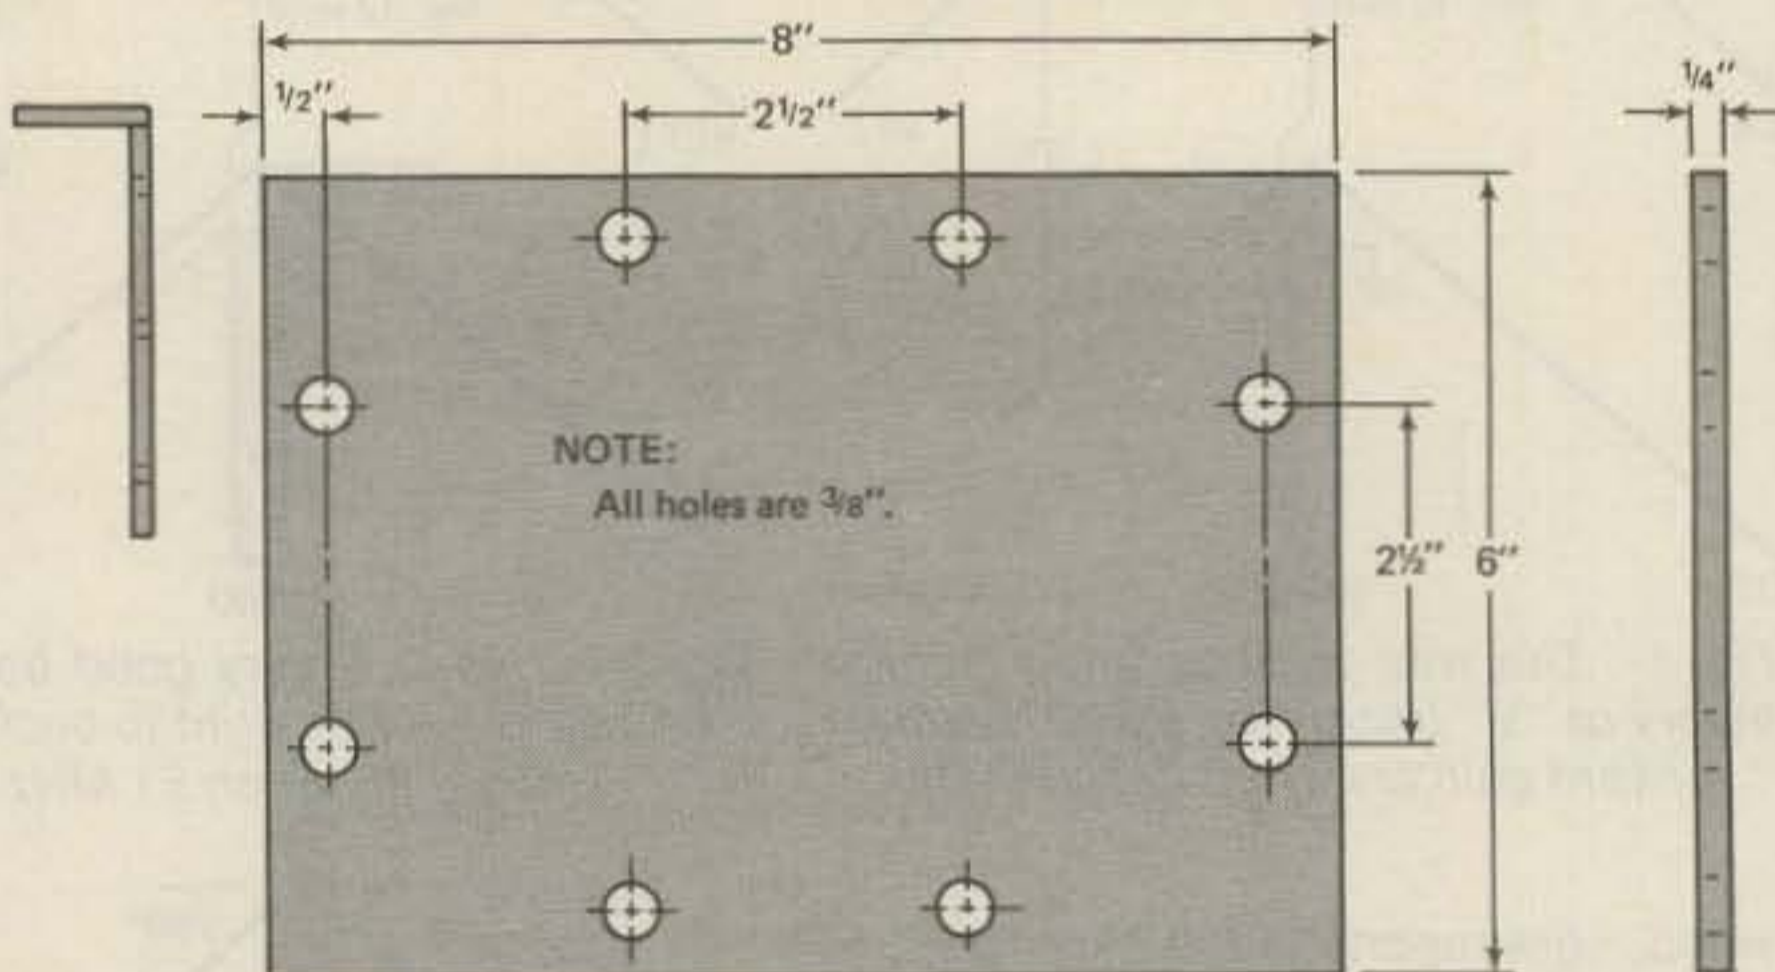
The 10 and 15 meter boom-to-mast mounting plate for 2 inch boom diameter and 2 inch mast diameter.
